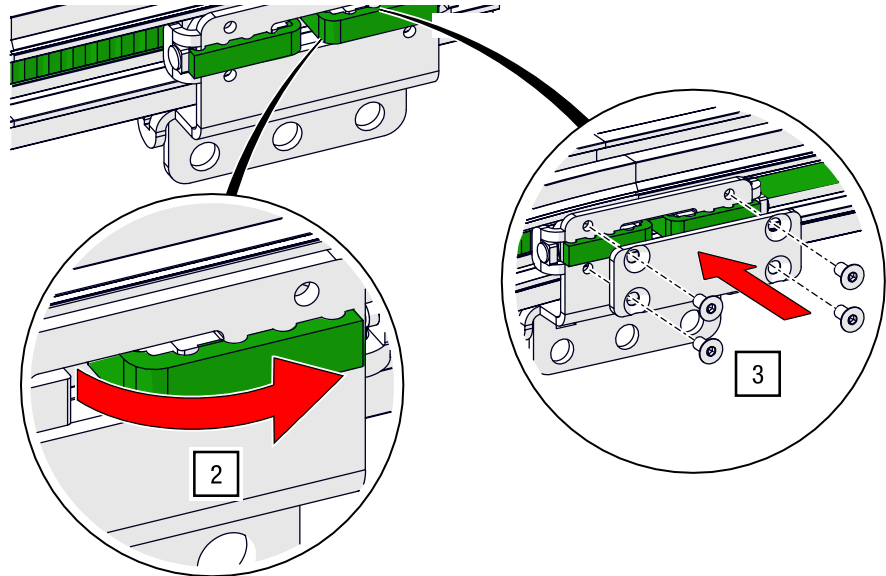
Timing belt installation – Guide belt ends through the master runner and clamp
